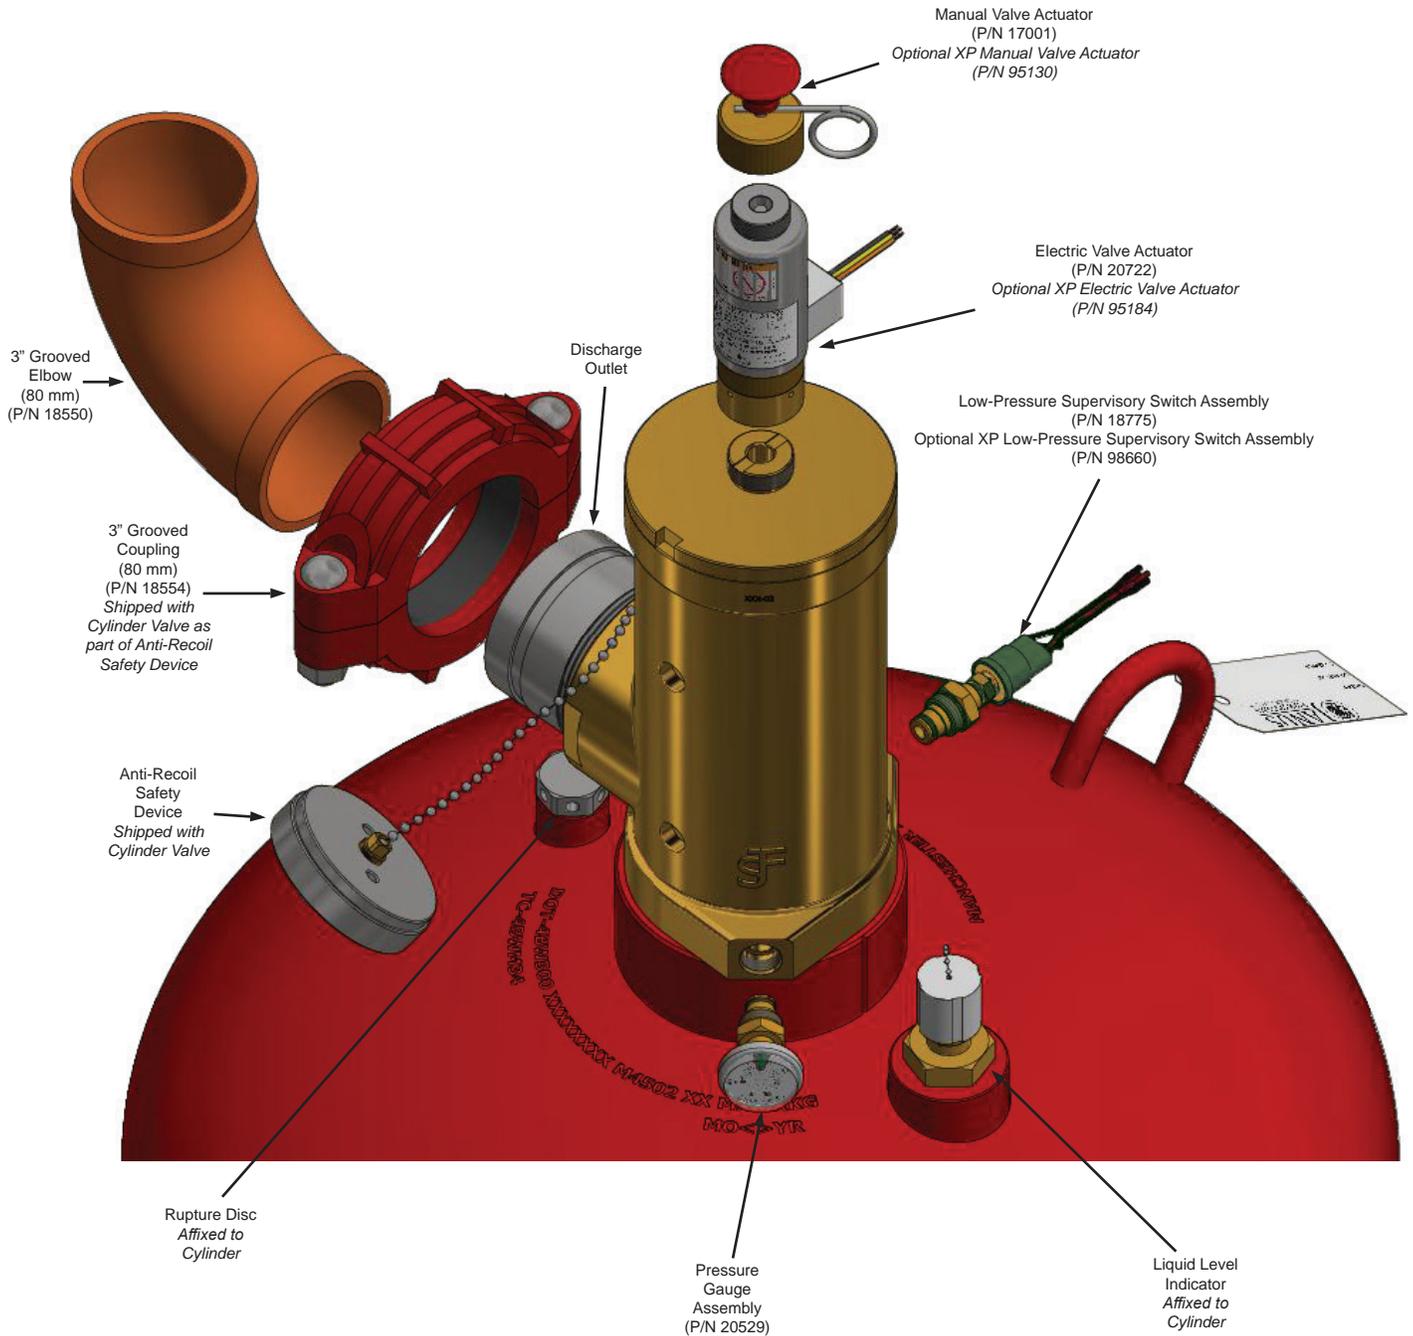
Lv Cylinder Valve w/ Trim Kit
